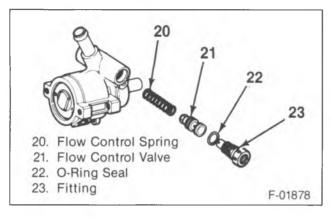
Removing the Fitting, Control Valve, Spring and Seal
